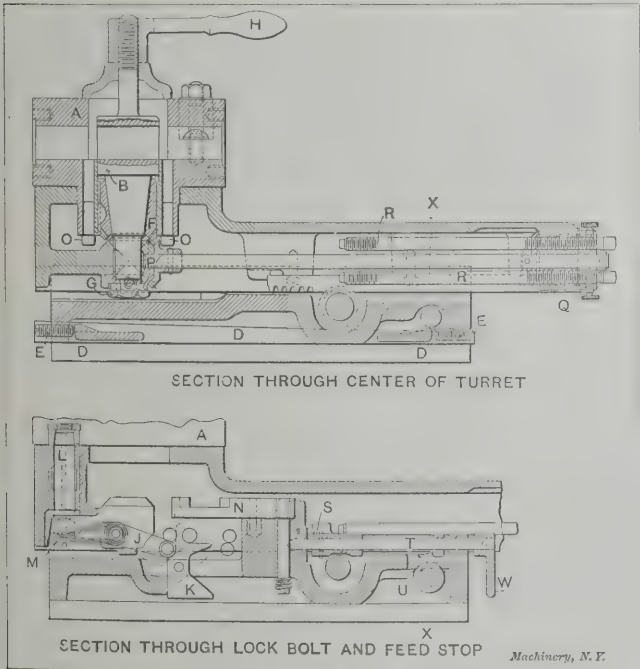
Longitudinal Sections, showing Turret Indexing and Feed Mechanisms
